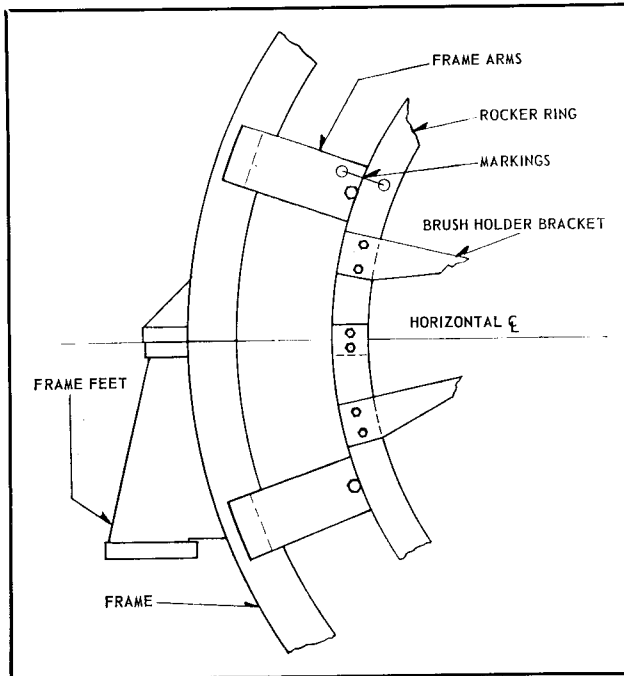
Locating Brush Position by Rocker-Ring and Frame Arm Markings on Standard D-C Generators and Motors
